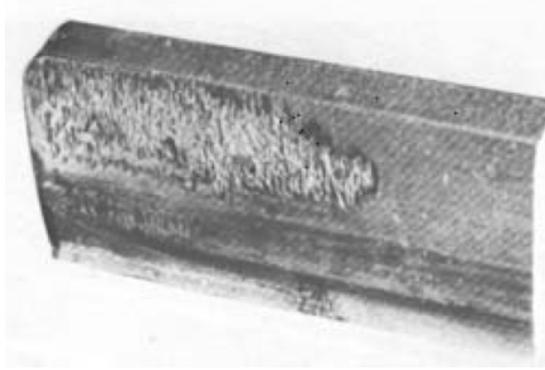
Image of Scoring defect on Gear Tooth (Source: [17])
